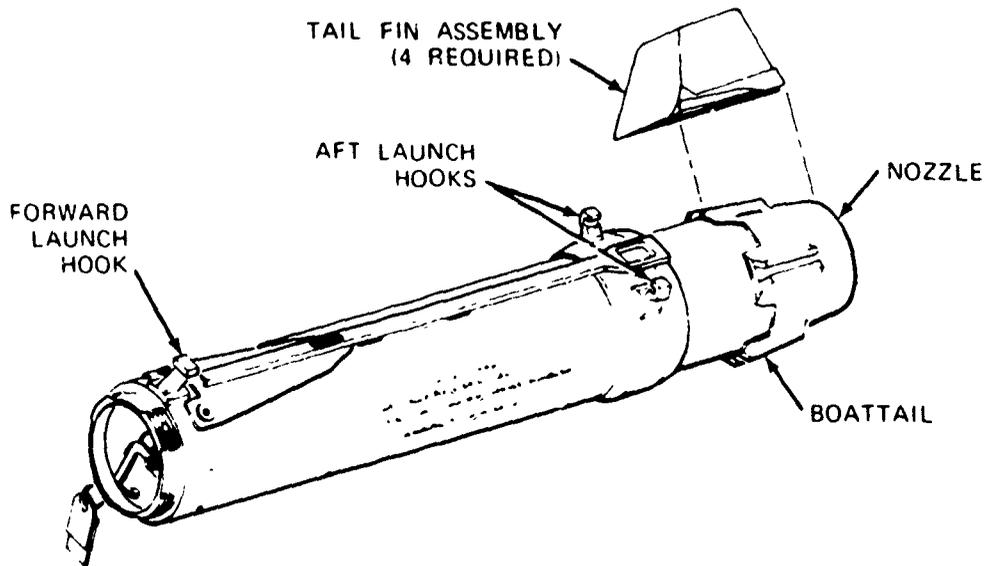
SHRIKE Rocket Motor Section Mk 39 Mod 0 3 W/Tail Fin Assembly
